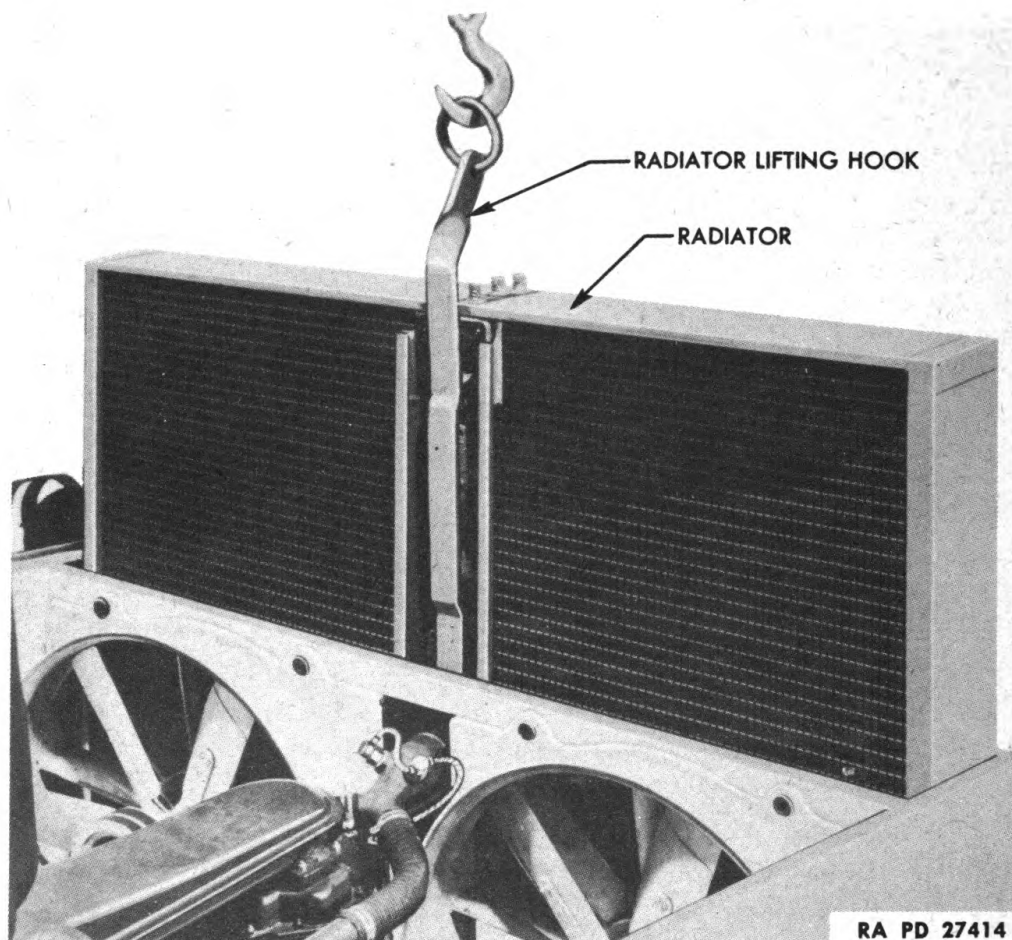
Removing Radiator Using Sling (41-S-3832-86)
